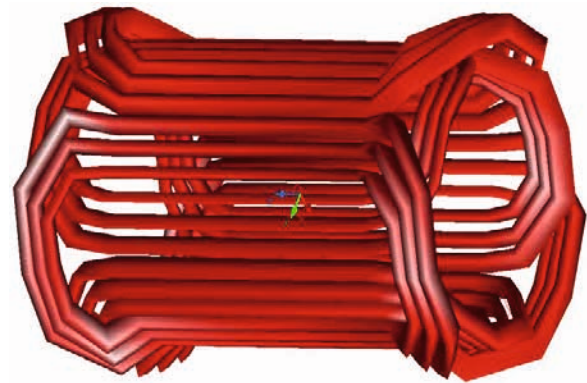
Model 3D of single layer stator winding of an electric machine with concentrically wound coils
